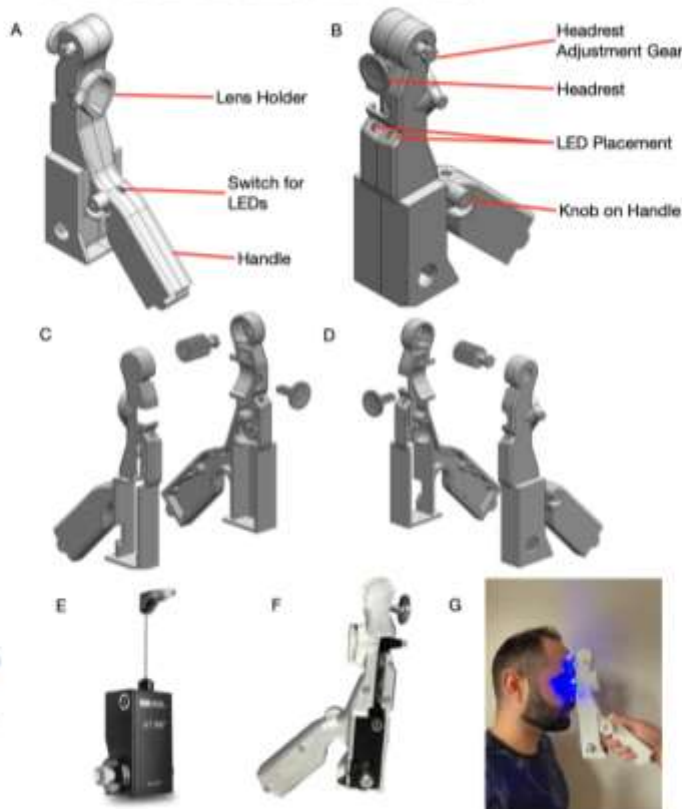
(A) Back-left view of device, (B) Front-left view of device, (C) Front-right exploded view of device, (D) Front-left exploded view of device, (E) Haag-Streit AT-900 Goldmann Applanation Tonometer [7], (F) 3D printed prototype, (G) Demonstration of earlier functional device prototype being used by authors.
